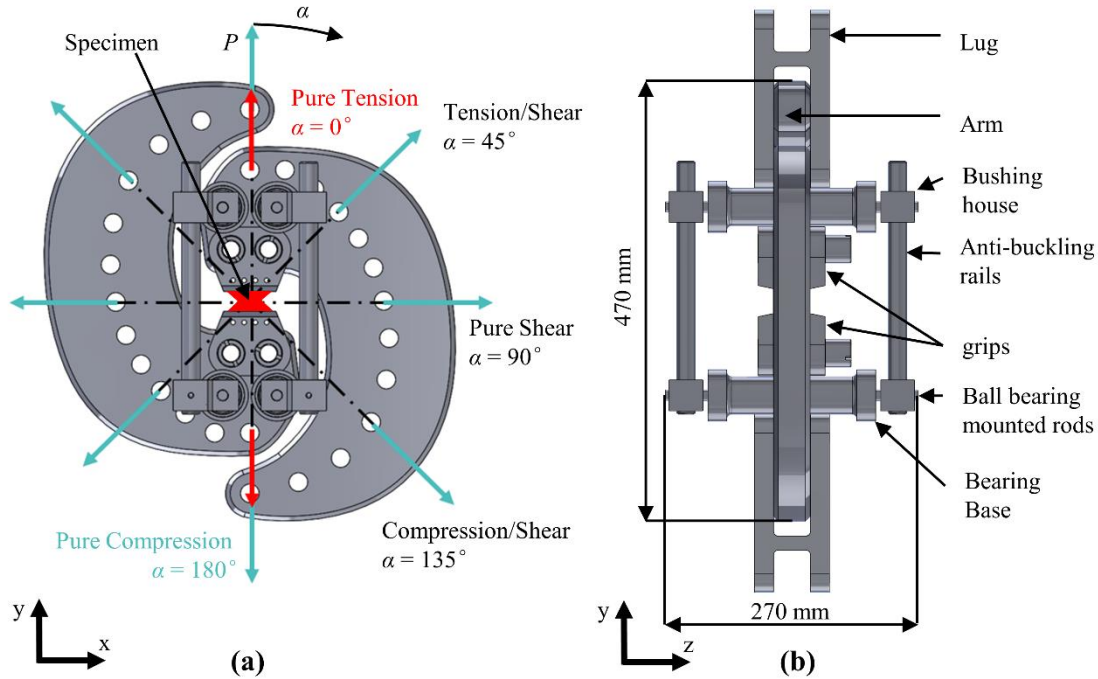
, The modified Arcan fixture (MAF) designed by Taher et al. [29]: (a) front view, and (b) side view.
